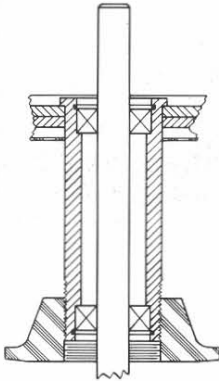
Section drawing showing how larger sleeve bolts are used when ball bearings are installed.
